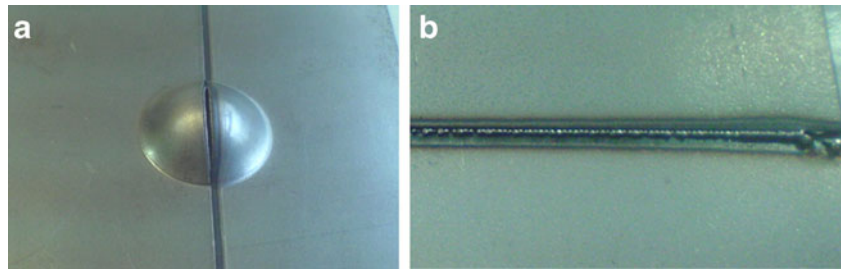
a Rupture in weld zone TWB in sphere head standard test due to incomplete penetration of weld and b cavity formation and additional meld of weld zone in TWB because of high inlet temperature
